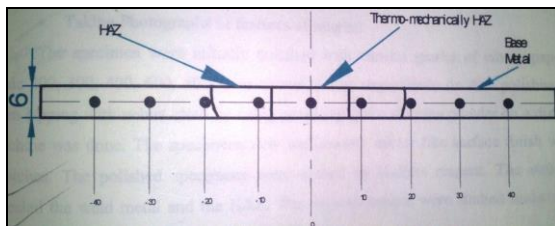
Hardness specimen of FSW Welded specimen
